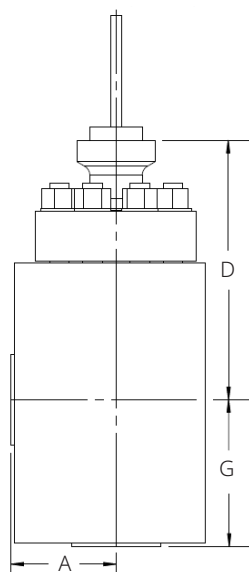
Typical CL2500 6-Stage NotchFlo DST Cast Angle Valve Dimensions (Also See Table 27)
